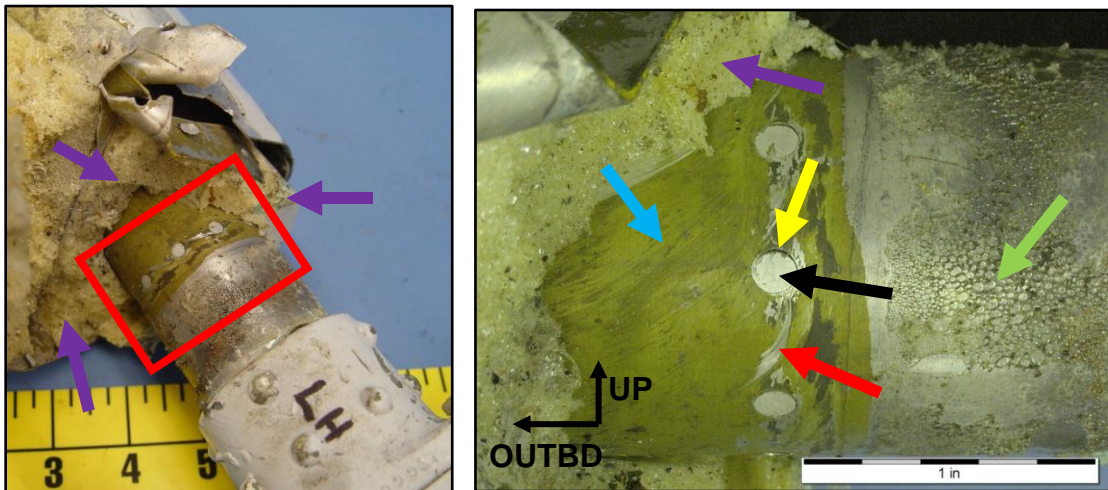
The left elevator inboard connection to the torque tube (left) and a closer view of the area in the red box (right).
